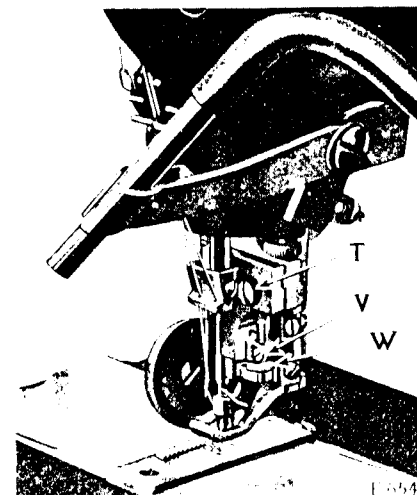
Showing Adjustment for Regulating Depth of Perforation
